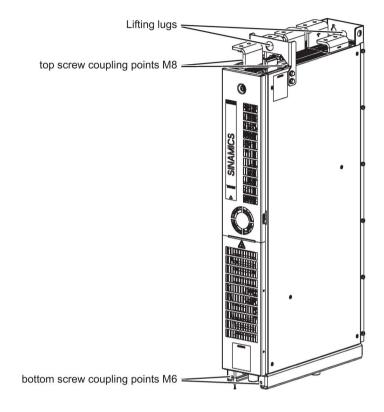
Lifting lugs / screw coupling points for mechanical support
